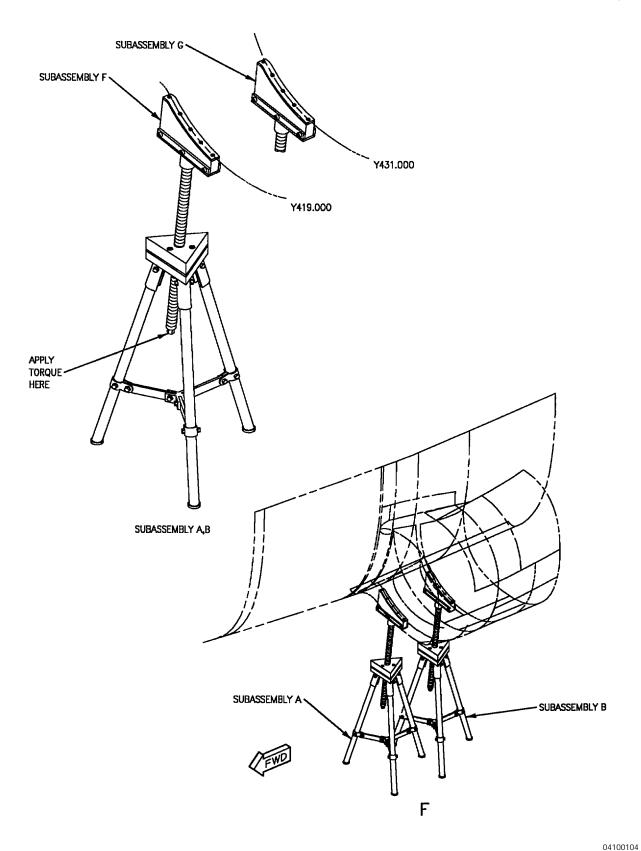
Engine Air Inlet Installation Alignment Fixture; RE474322020-1/-2 (Sheet 4)
